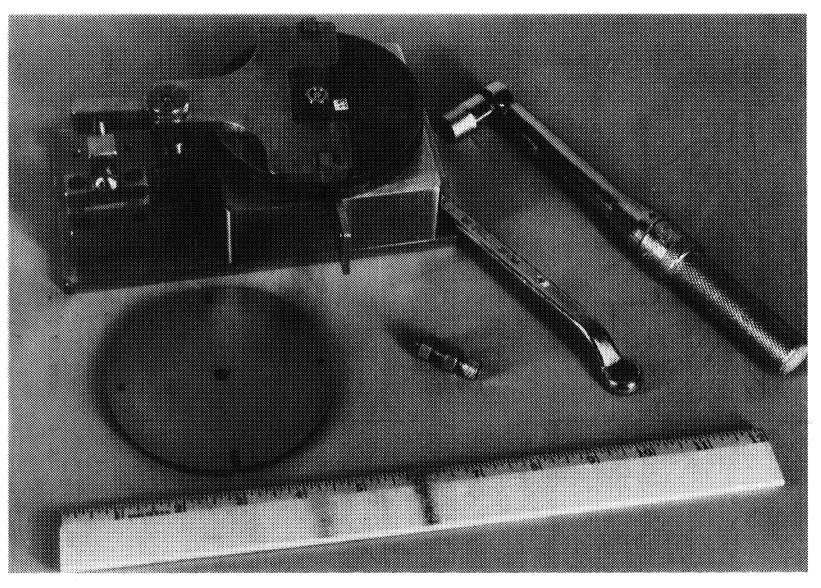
PLATE SPECIMEN, BOLT AND NUTS, FIXTURE AND TOOLS.
